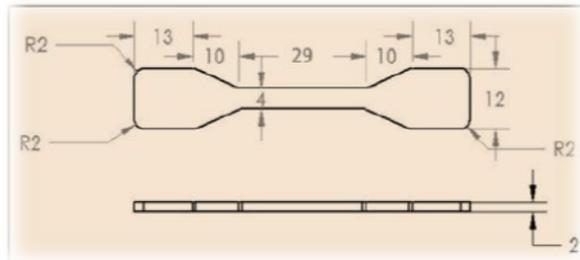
Sample of injected mould product with dimension (in millimetre)
